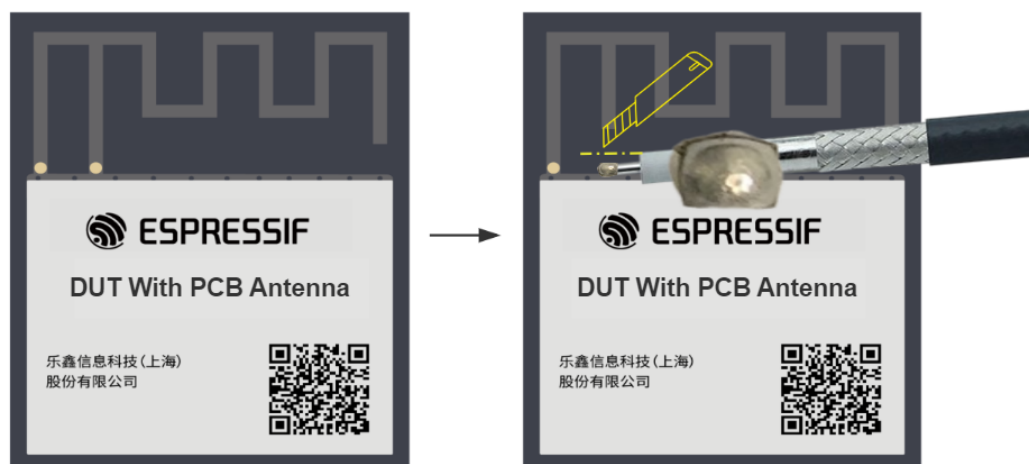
Soldering RF Connection Cable to Module with Onboard PCB Antenna
